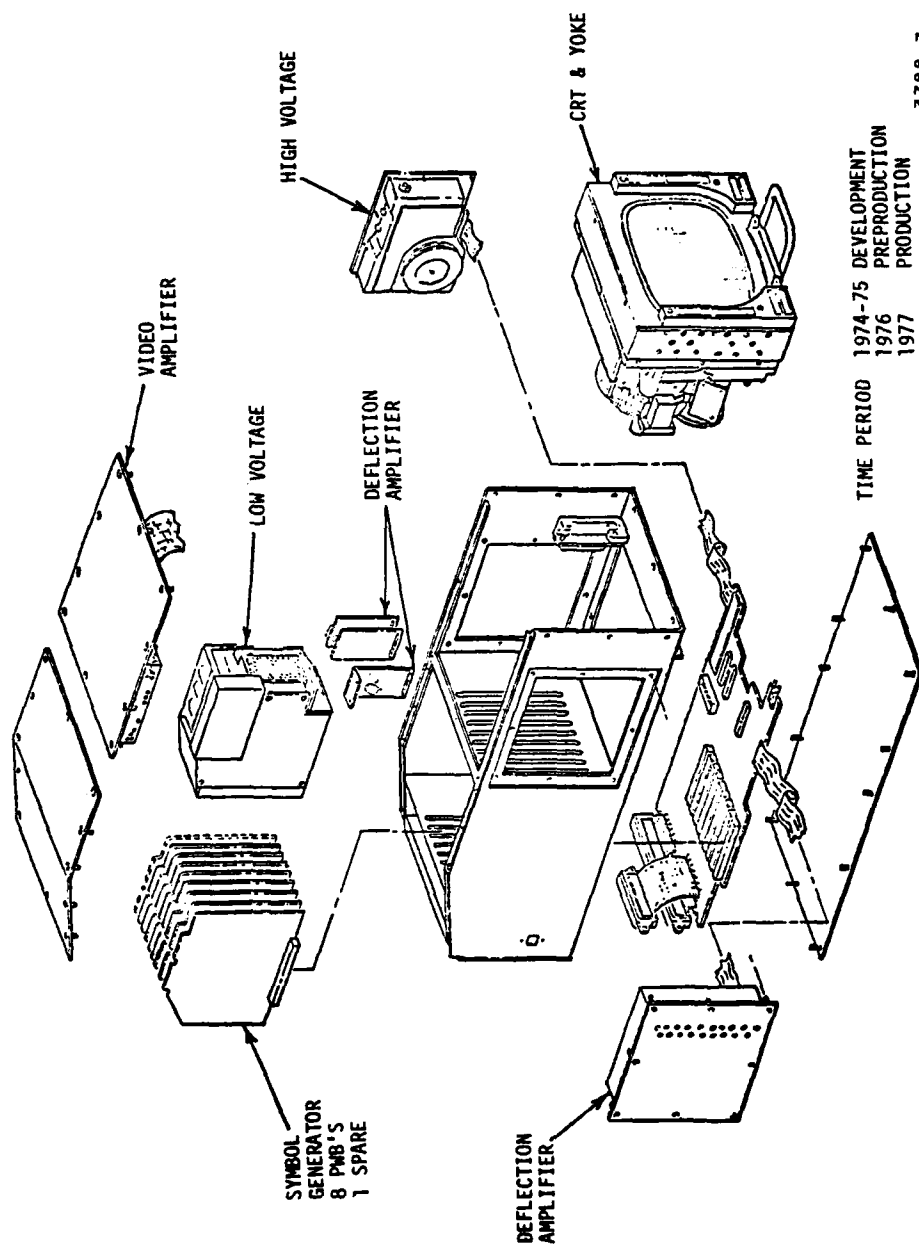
Exploded View, IP-722(XJ1) AVA-1
